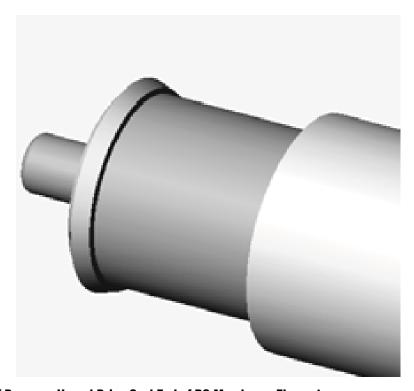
Inlet end of Pressure Vessel Brine Seal End of RO Membrane Element
